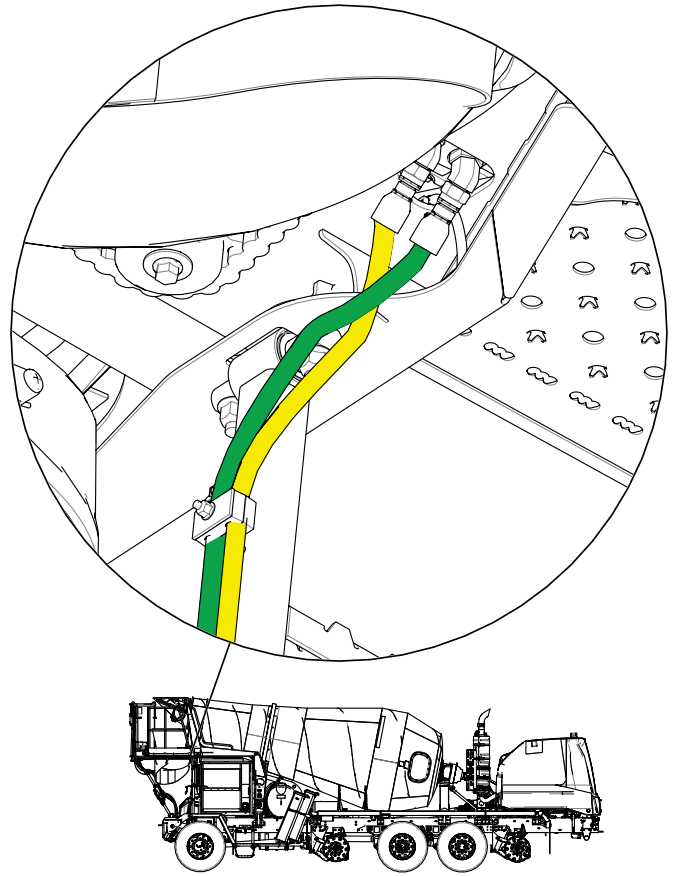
Chute Rotation Gear Box Hydraulic Motor Lines
